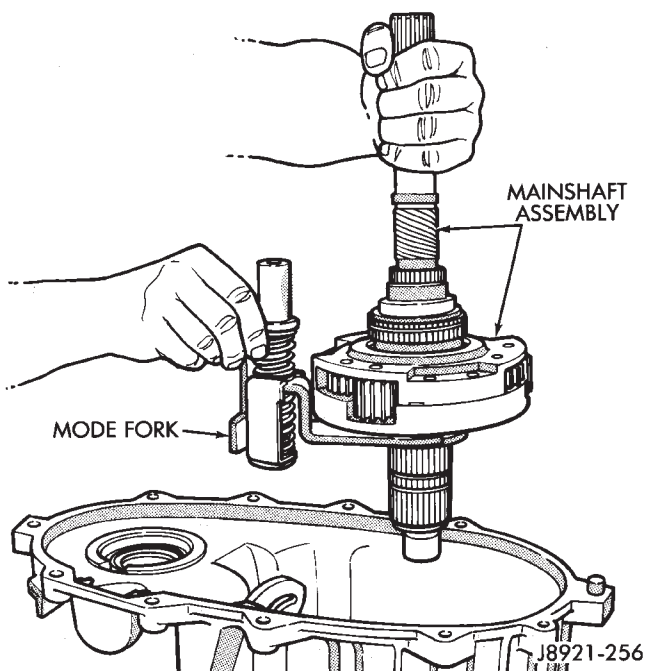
Assembled Mainshaft And Mode Fork Installation
